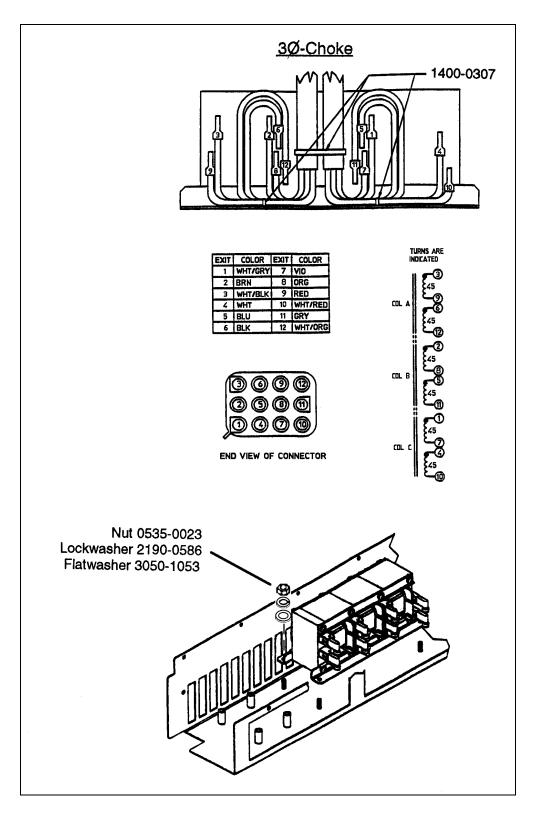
Three-Phase Line Choke Subchassis Wiring
